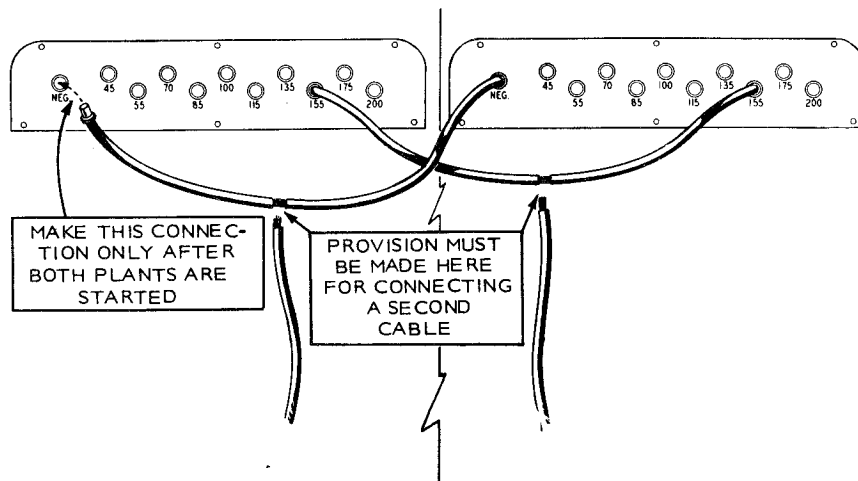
WIRING CONNECTIONS FOR WELDING IN PARALLEL
